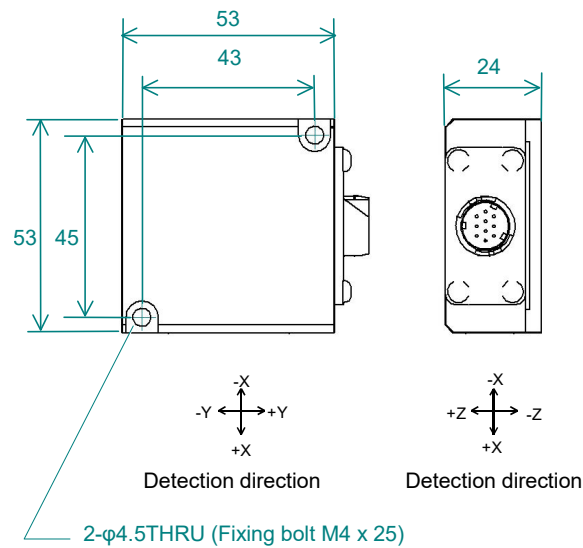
(a) Dimensions of the wired accelerometer
